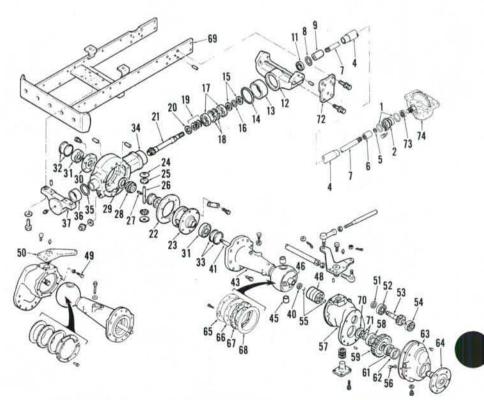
Exploded view of front wheel drive axle assembly used on 1300 models.
